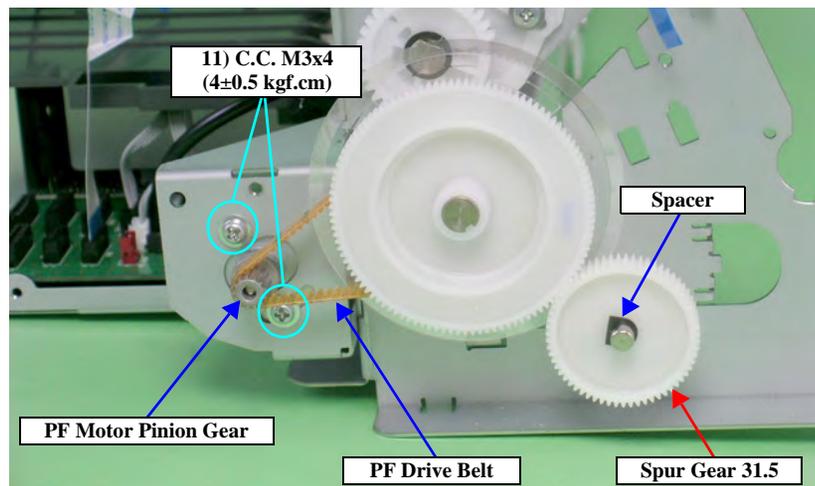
Removing the PF Drive Belt and Spur Gear 31.5
